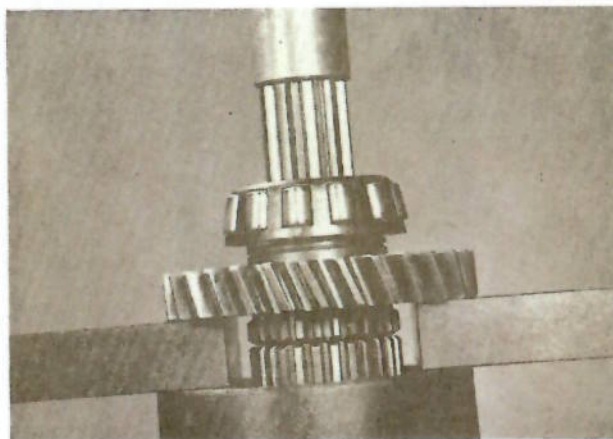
REMOVING THE CONE OF FRONT TAPERED ROLLER BEARING FROM THE TRANSFER DRIVE SHAFT.
